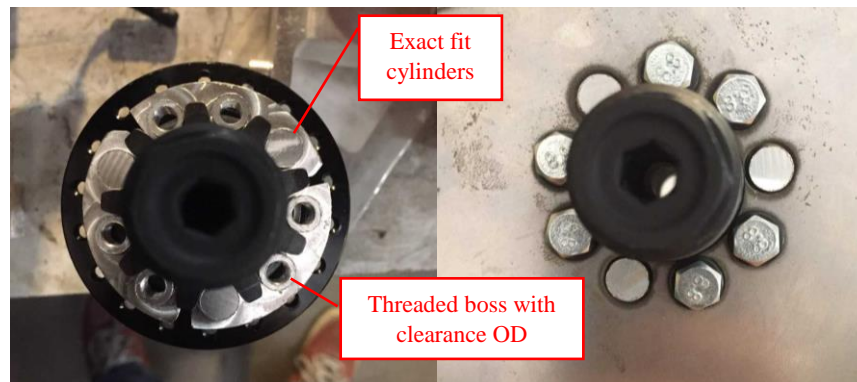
Sprocket fasteners on the hub (left) and the test sprocket secured onto the hub (right).
